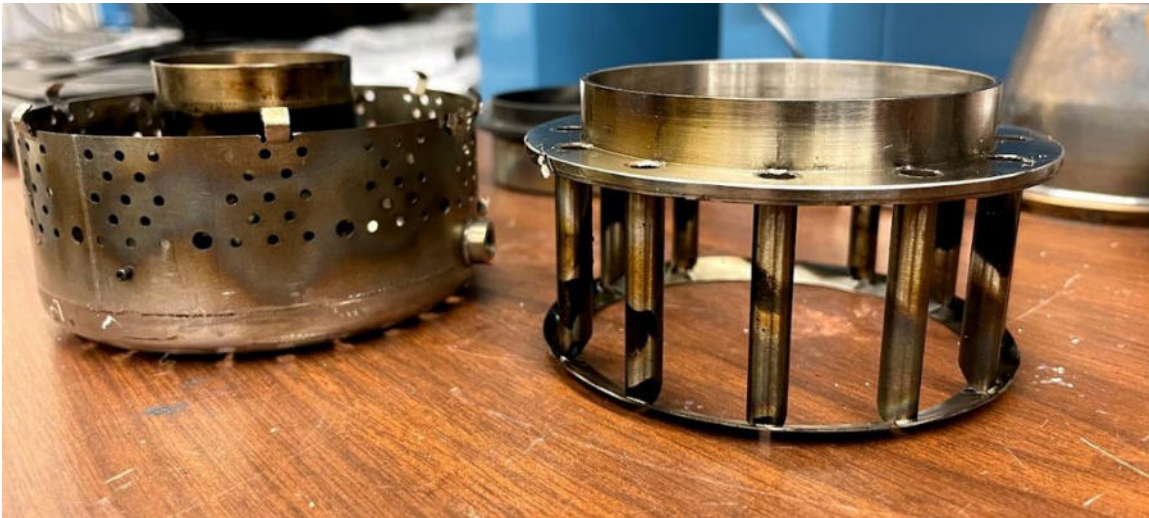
P160 compact combustor liners and fuel vaporizer tube assembly post-machining and laser-welding
